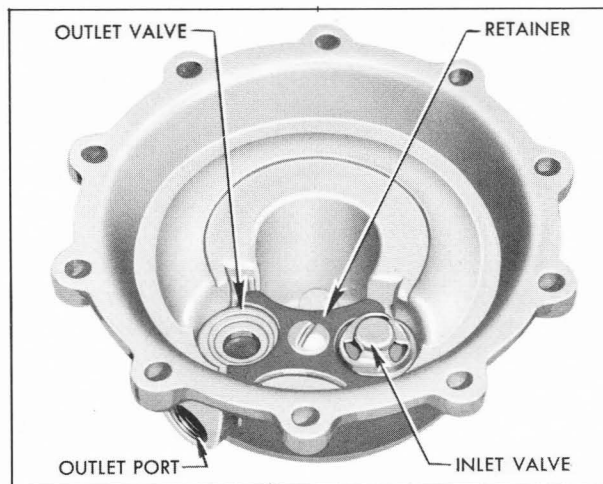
Valves and Retainer Installed in Vacuum Cover
